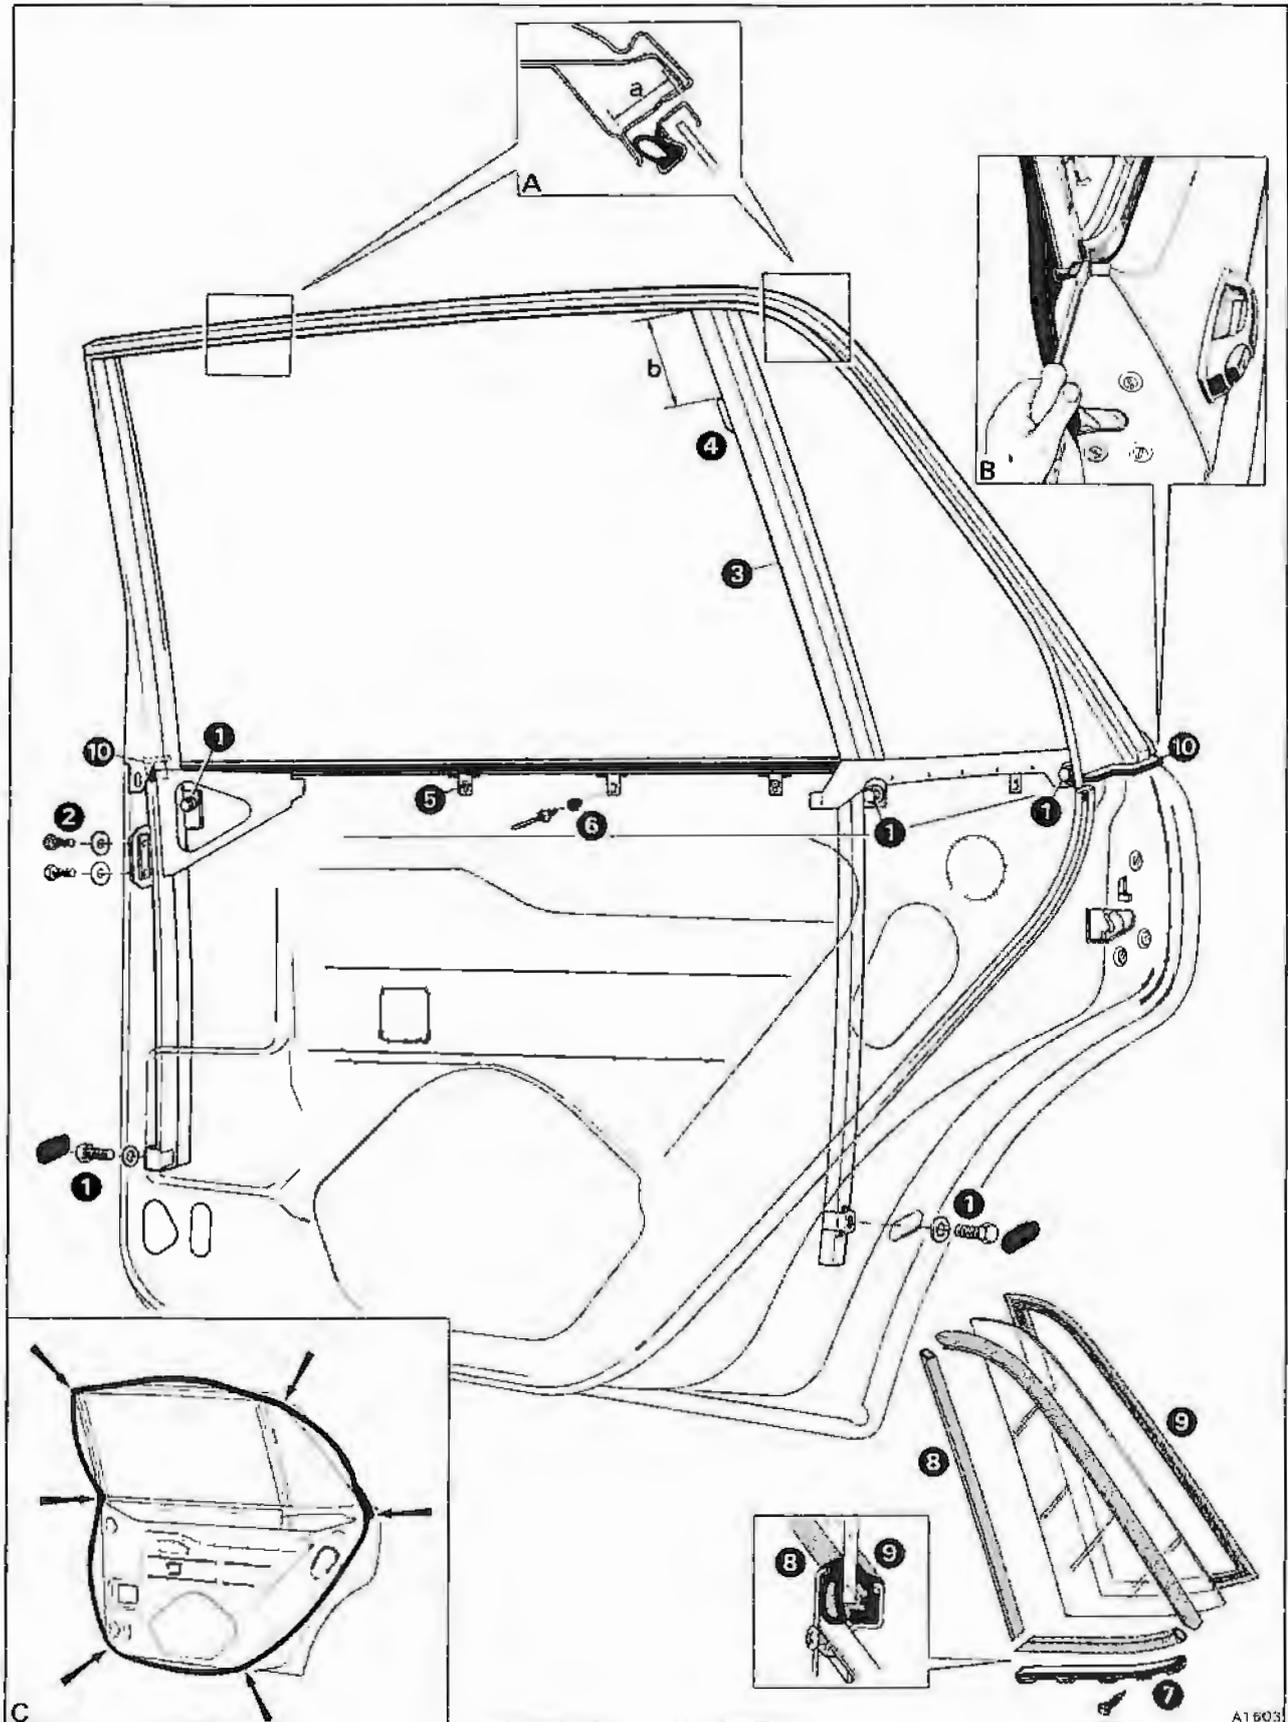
Door frame, door to body seal, quarter glass sealing arrangement, and fittings
